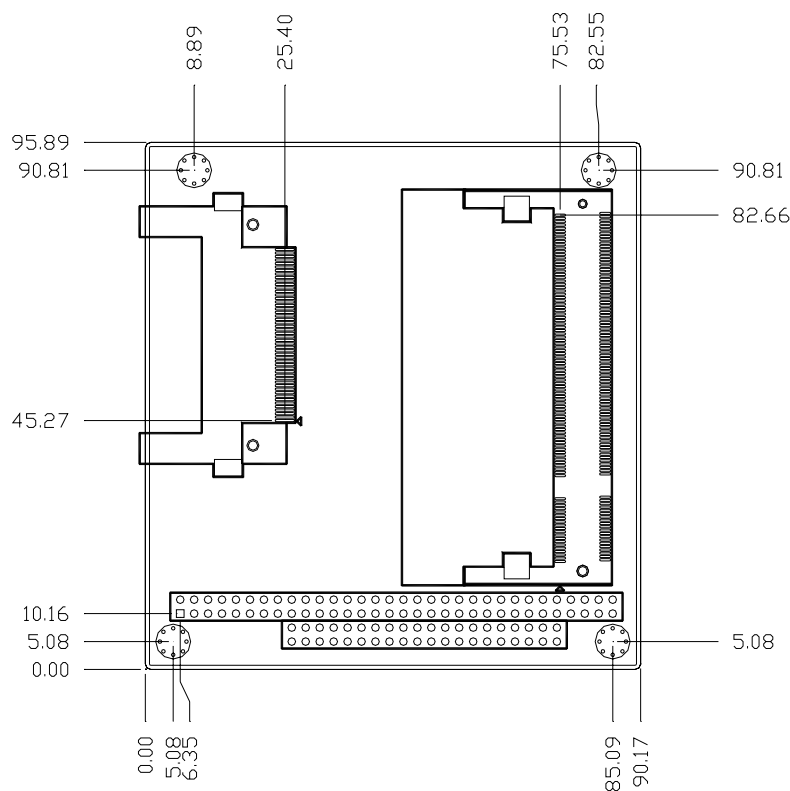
PCM-3355 Mechanical Drawing (Solder Side)
